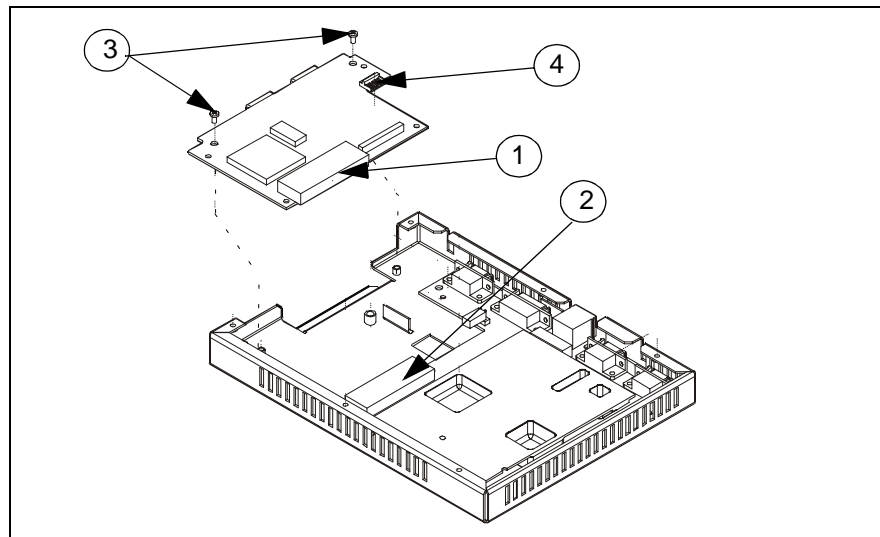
Removing/Installing MIB 1&2 Option PC board
